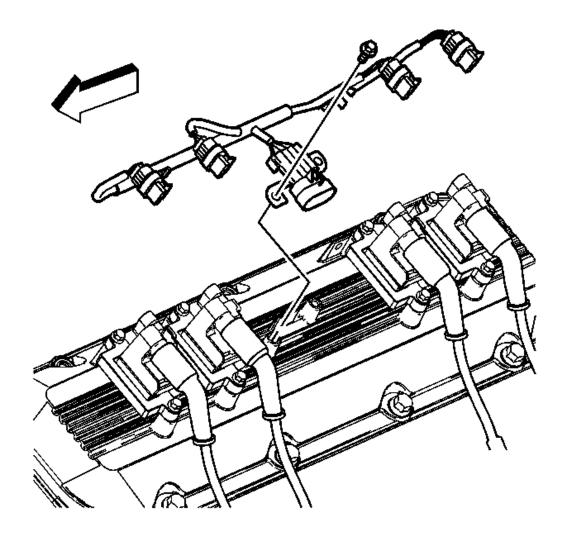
View Of Ignition Coil Wiring Harness Courtesy of GENERAL MOTORS CORP.
